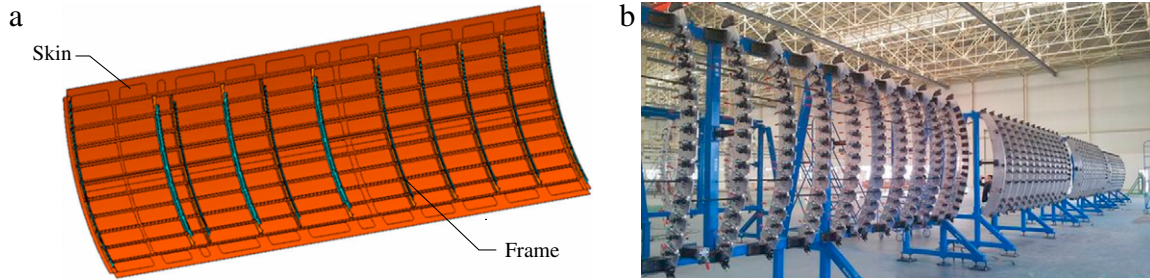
An aeronautical panel subassembly of mid fuselage and its assembly fixture.
